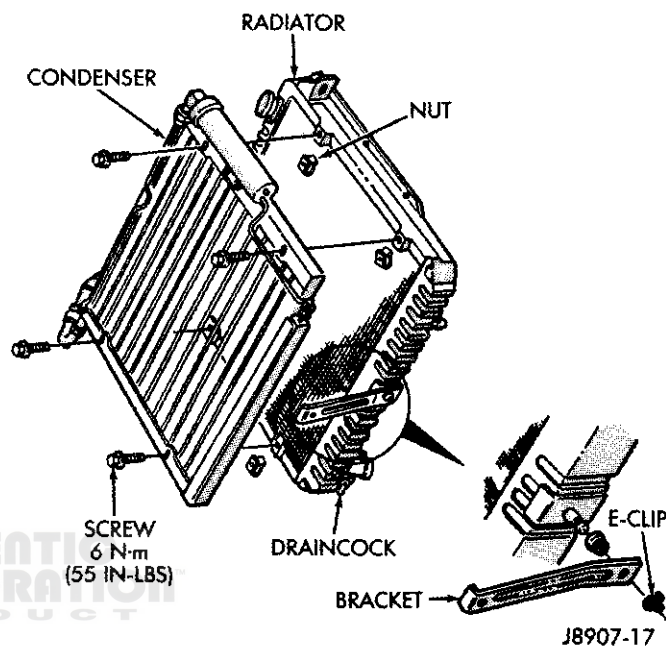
Radiator Remove/Install MJ and XJ Vehicles—2.5L
